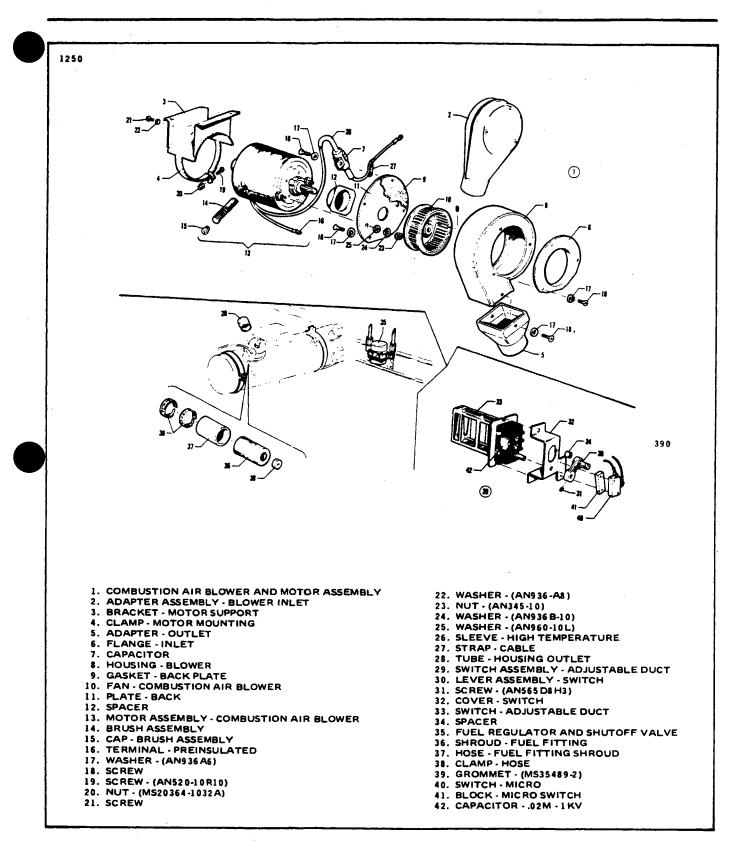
Combustion Air Blower and Motor Assembly 41D07, System No. 2
